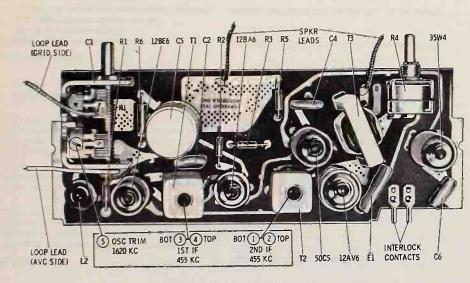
PLATED CHASSIS BOARD WIRING AS VIEWED FROM COMPONENT SIDE
